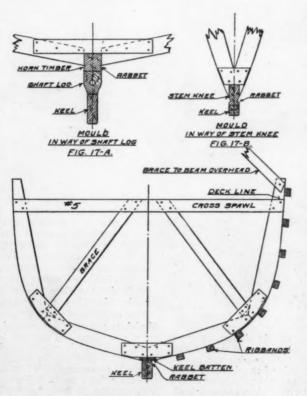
Typical method of assembling the mould, and methods of securing to keel and stem
